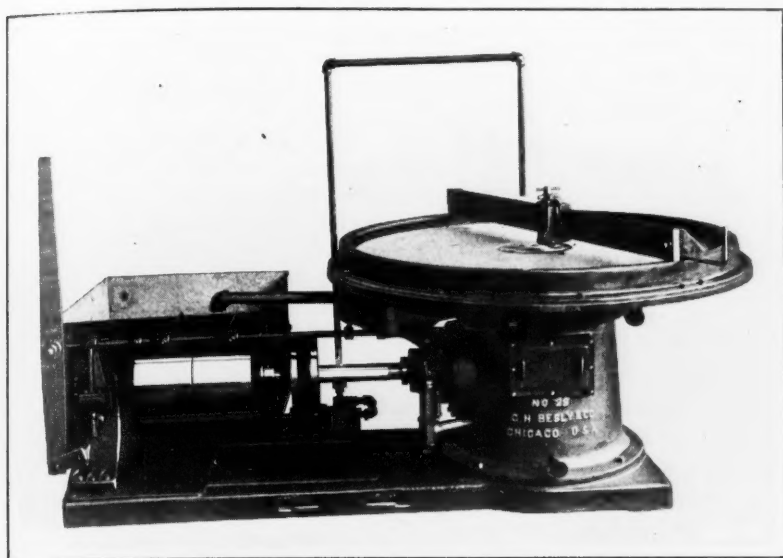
Grinder with Disk Wheel Truing Device in Place
